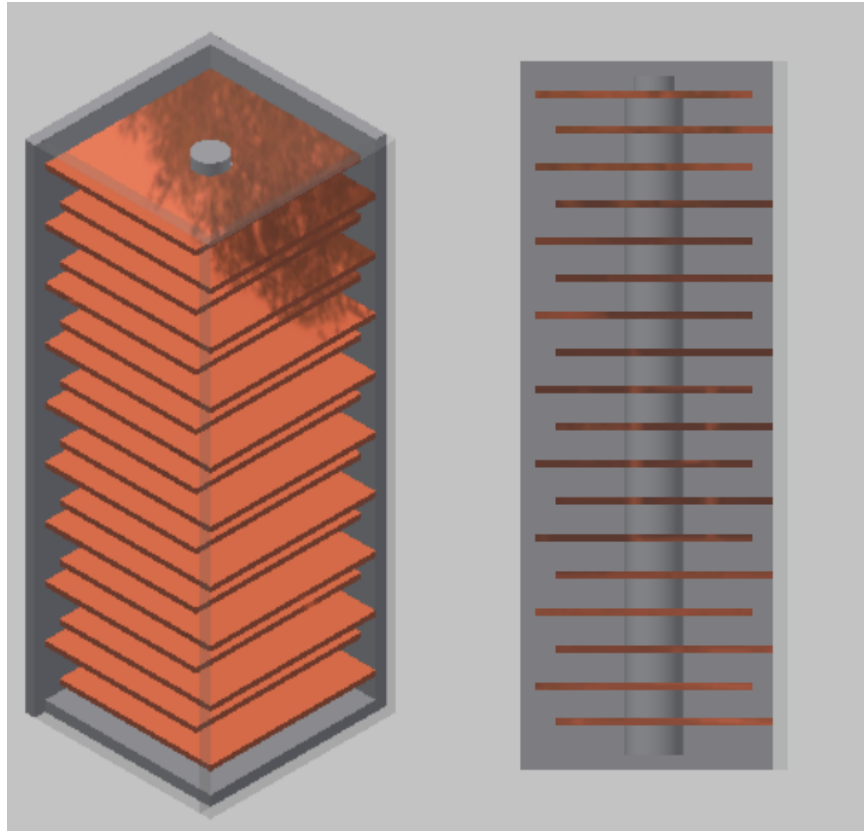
Shown above are two views of a 3D model of the first heat exchanger prototype. Two outer stainless steel walls are transparent to show the internal geometry. A rod was welded to the bottom of the heat exchanger. Stainless steel spacers and copper fins were stacked along the length of the heat exchanger. Helium gas enters through the bottom via a 1/4" VCR fitting (not shown). The orientation of the fins were designed to force the gas to serpentine around each fin and maximize the total gas path length through the heat exchanger. Gas exits the heat exchanger through a 1/4" VCR fitting at the top (not shown).
